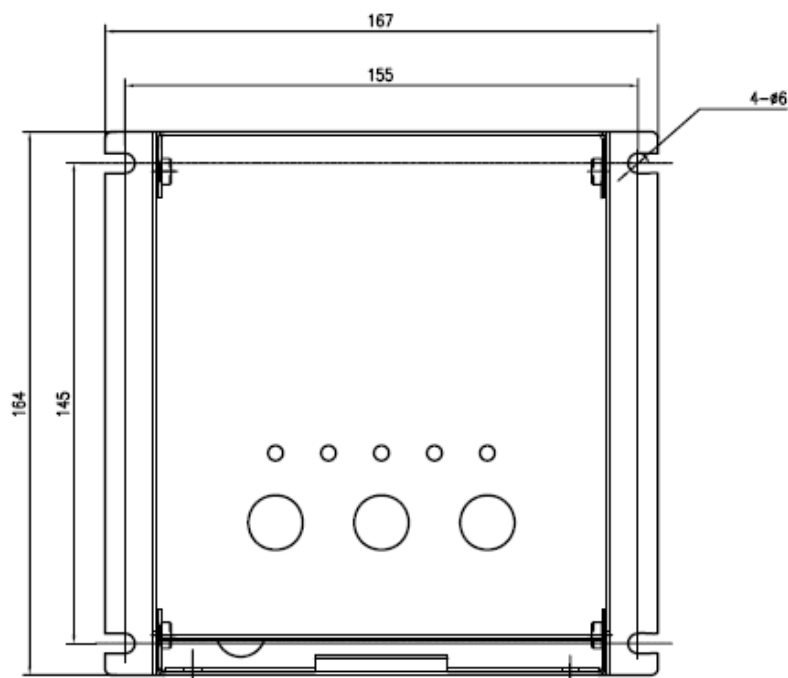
EXTERIOR DIMENSION FRONT VIEW (SJT—EPB110P/N)
